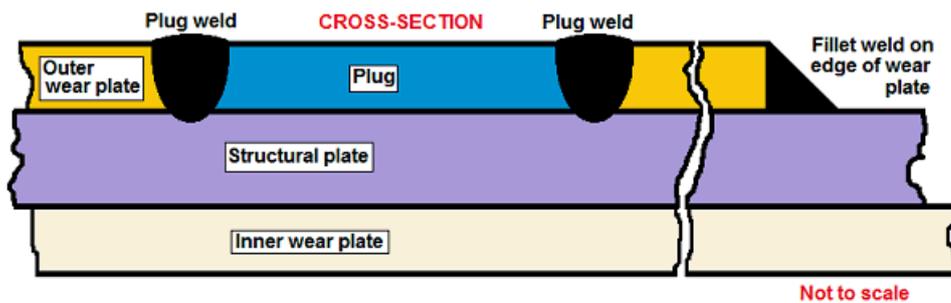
Sketch of cross-section through welds, plugs and plates
